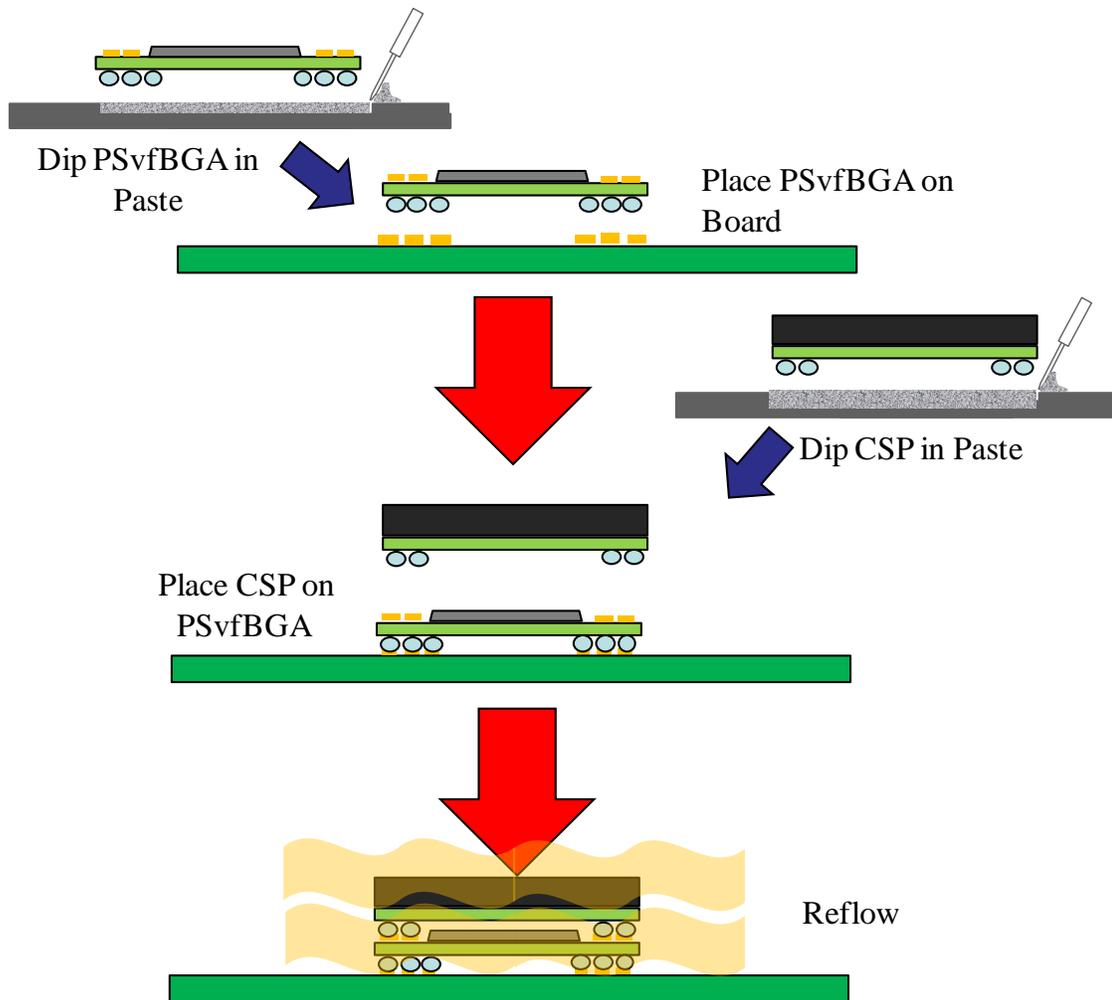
Process flow adopted for assembling Package-on-Package components on the test vehicle
